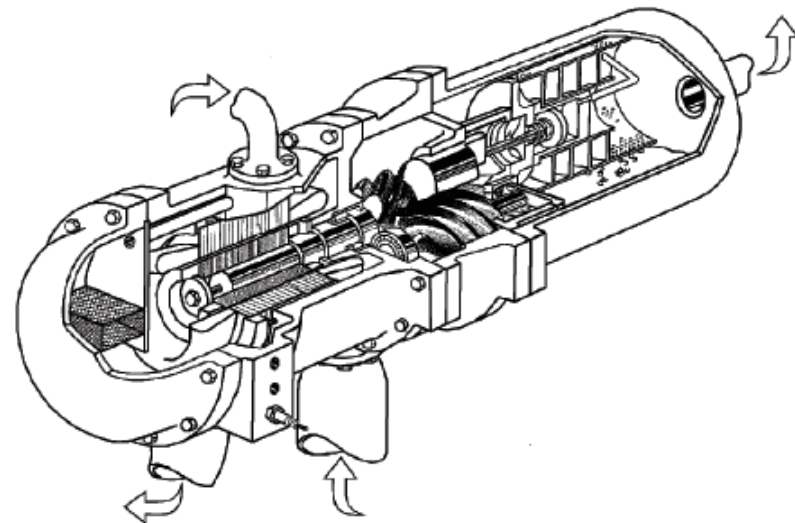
Semihermetic Twin-Screw Compressor with Motor Housing Used as Economizer; Built-In Oil Separator, and Slide Valve Unloading Mechanism
